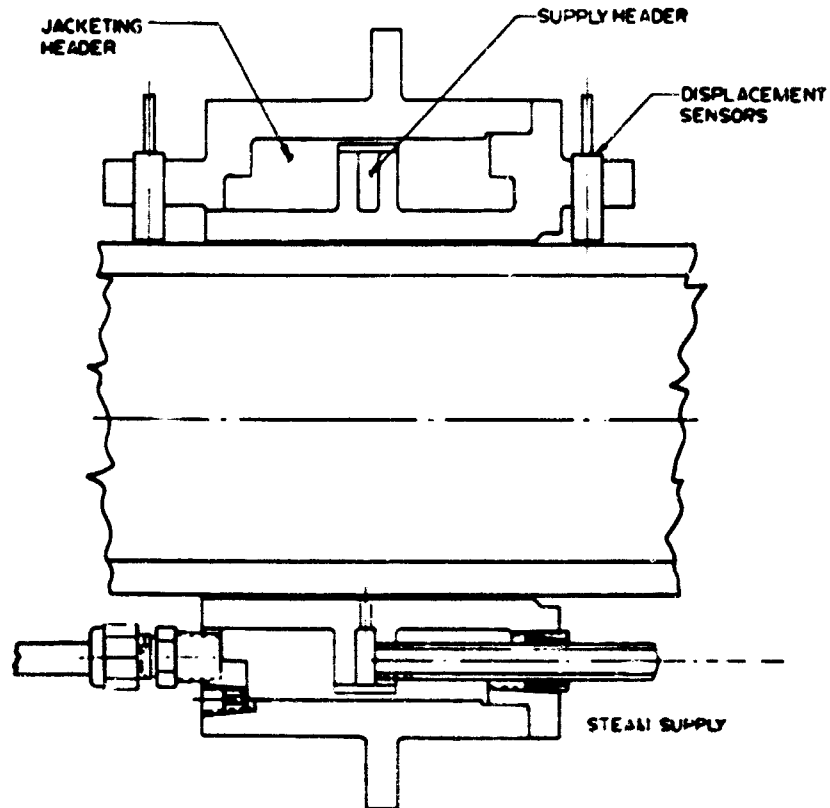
Schematic Diagram of a dual Manifold Single Admission Plane Steam Journal Bearing
